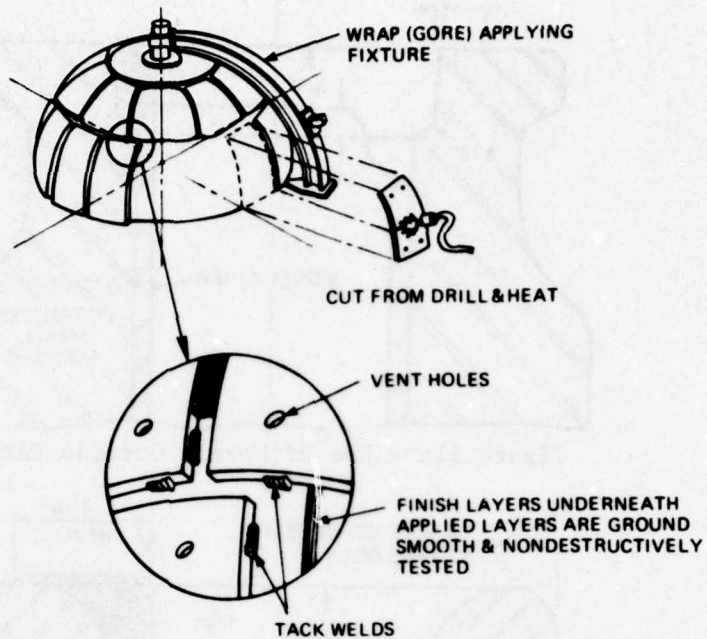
Layered Hemispherical Head Fabrication Procedure
